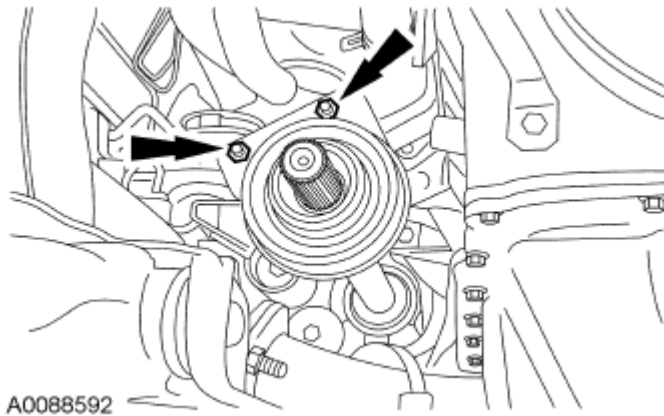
Locating Intermediate Shaft Bearing Retainer Nuts
